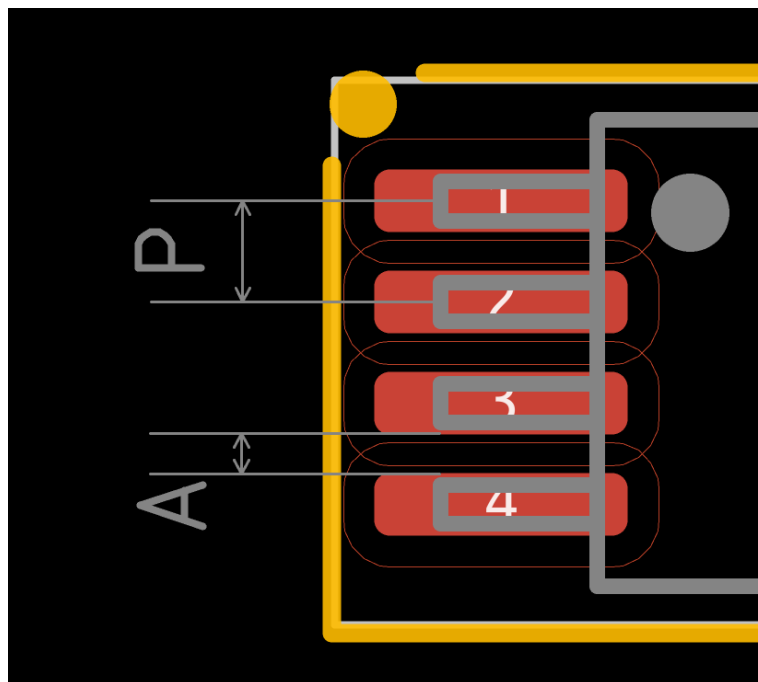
SMD footprint with pin pitch (P) and copper to copper clearance indicated.
